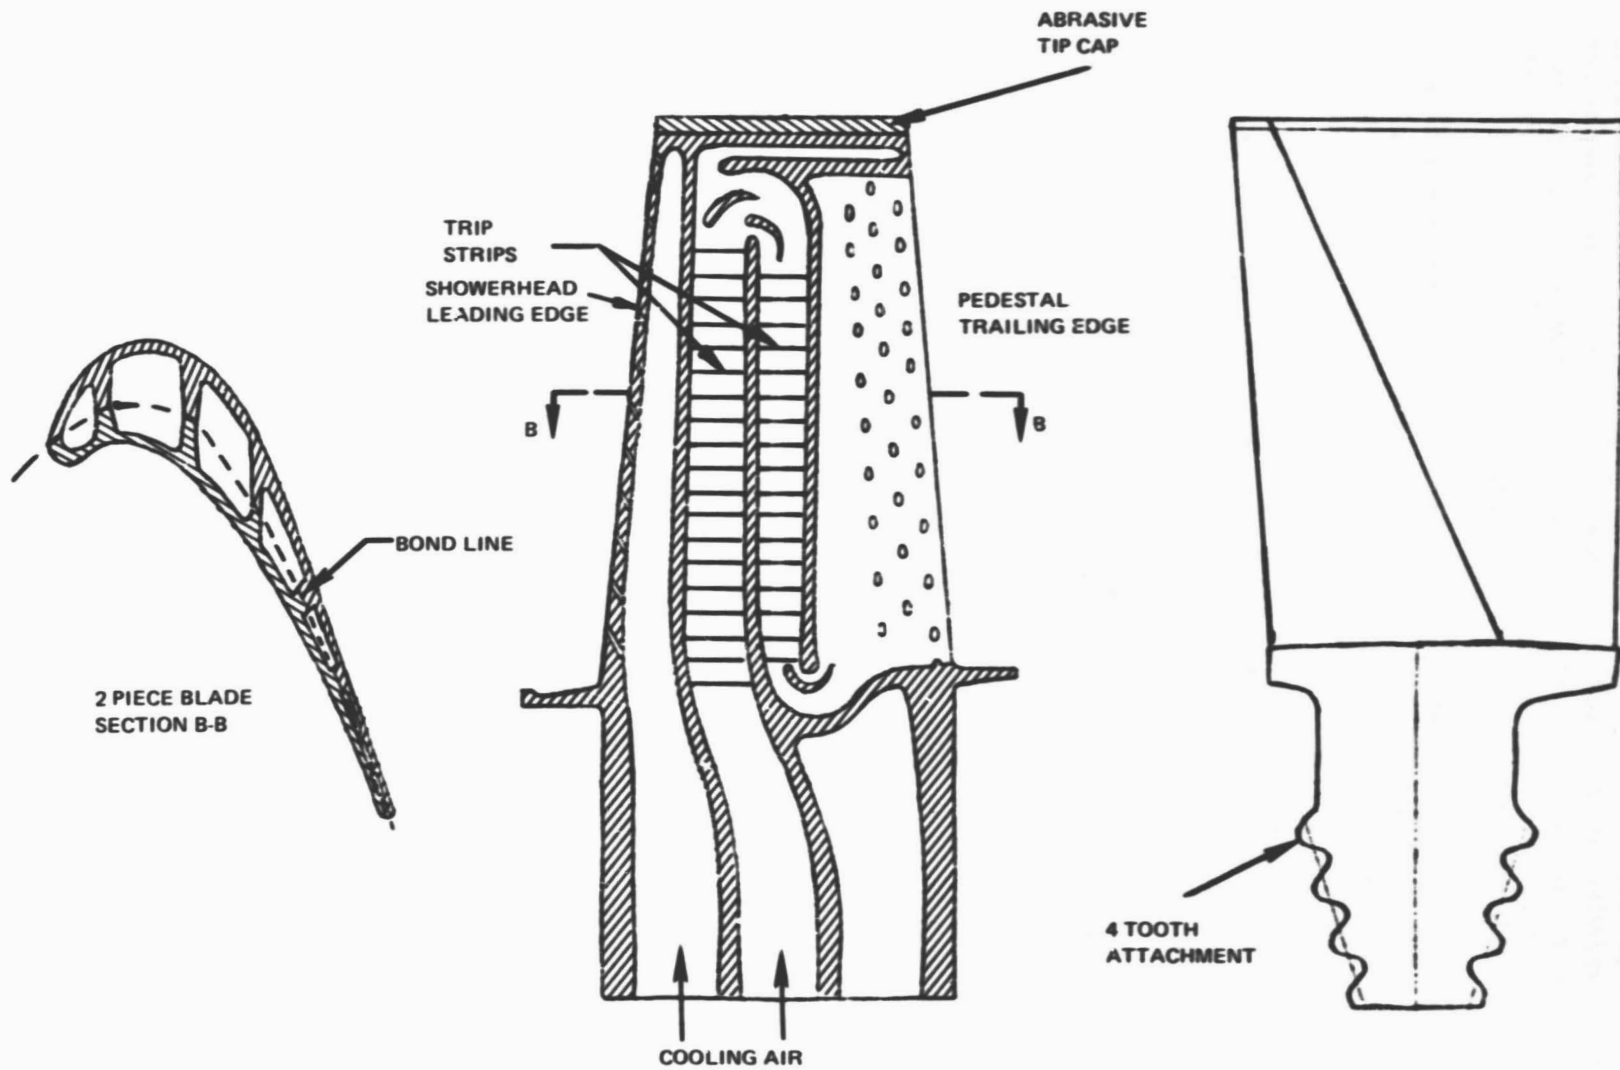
High-Pressure Turbine Blade Configuration Showing Two-Piece Fabrication and Cooling System
